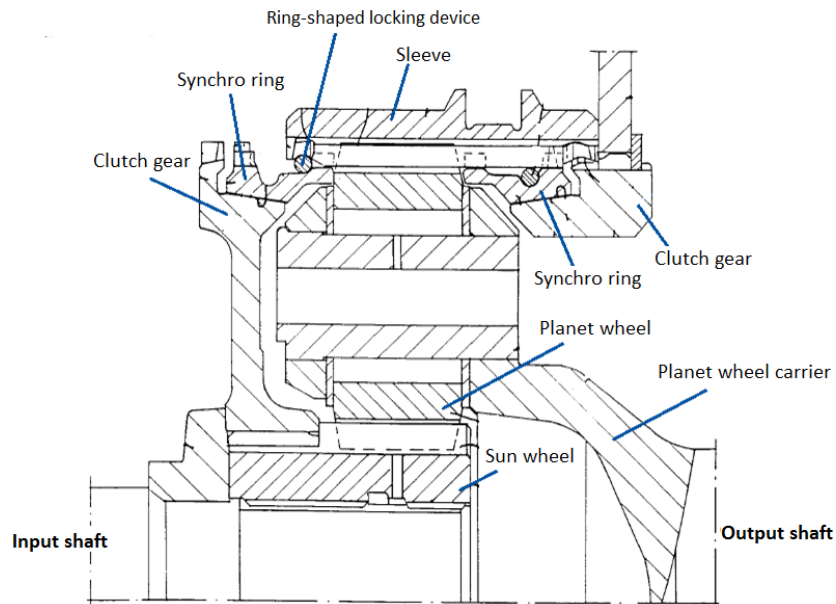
Synchronizer for planetary gears (Swedish Patent WO 01/55620).
